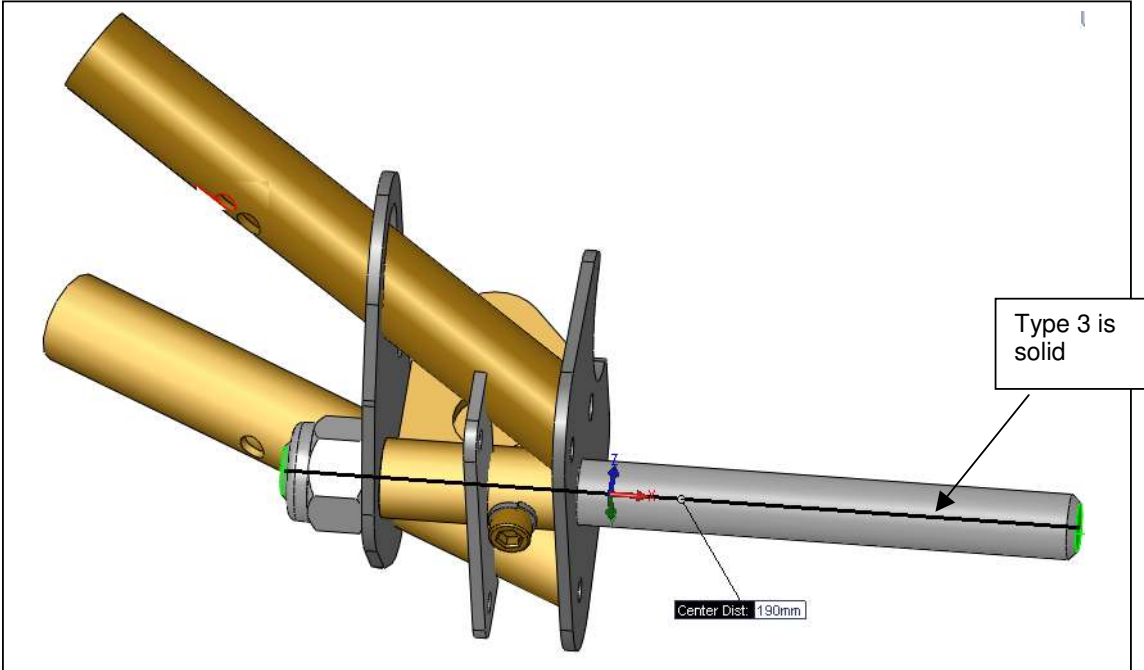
Type 3 axle image (From 7392). To be replaced by the type 4 axle using the retrofit kit 110030 - HUB AXLE EDGE XT TYPE 4 RETRO KIT
